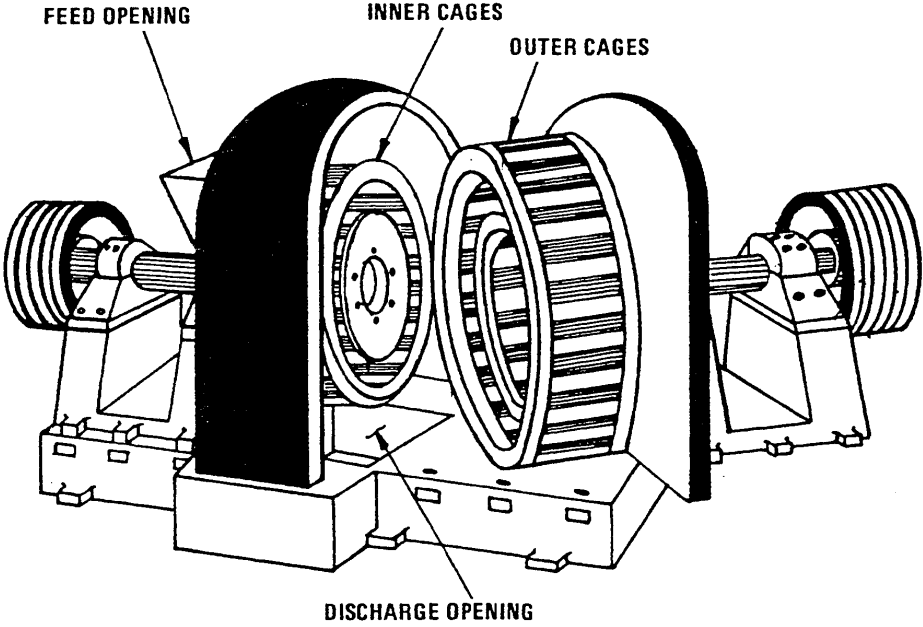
MULTIPLE CAGE MILL (4 ROW ILLUSTRATED).
